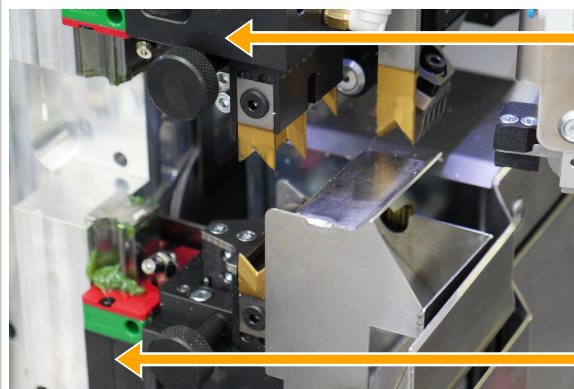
CrimpCenter 64 SP - Cutting Unit
